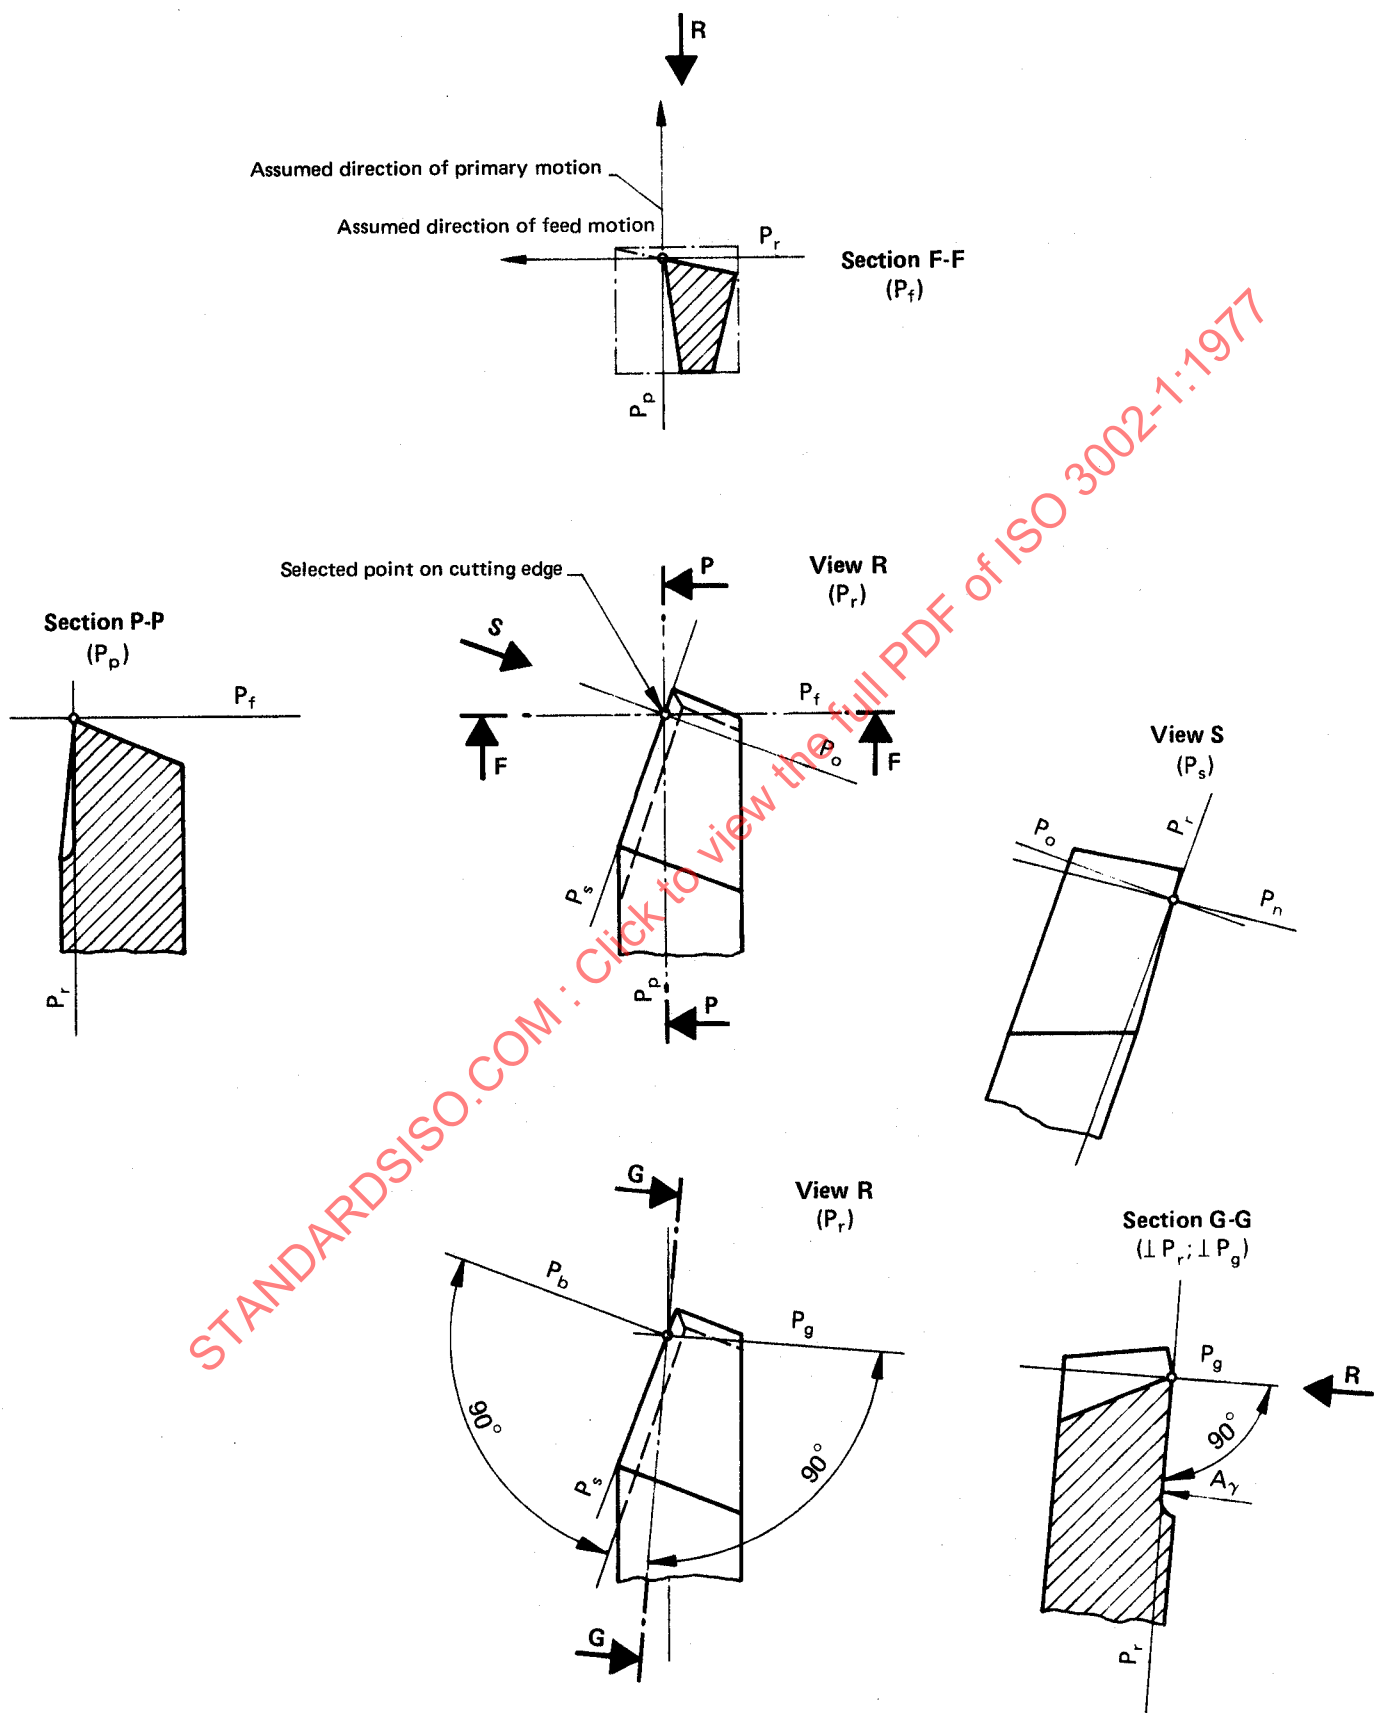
Planes in the tool-in-hand system — Turning tool
